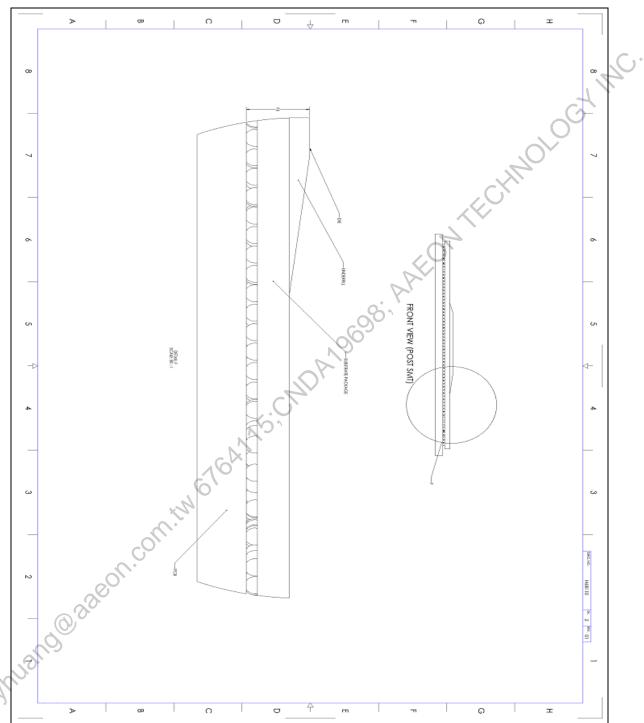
Package Mechanical Drawing—Part 3 of 3
